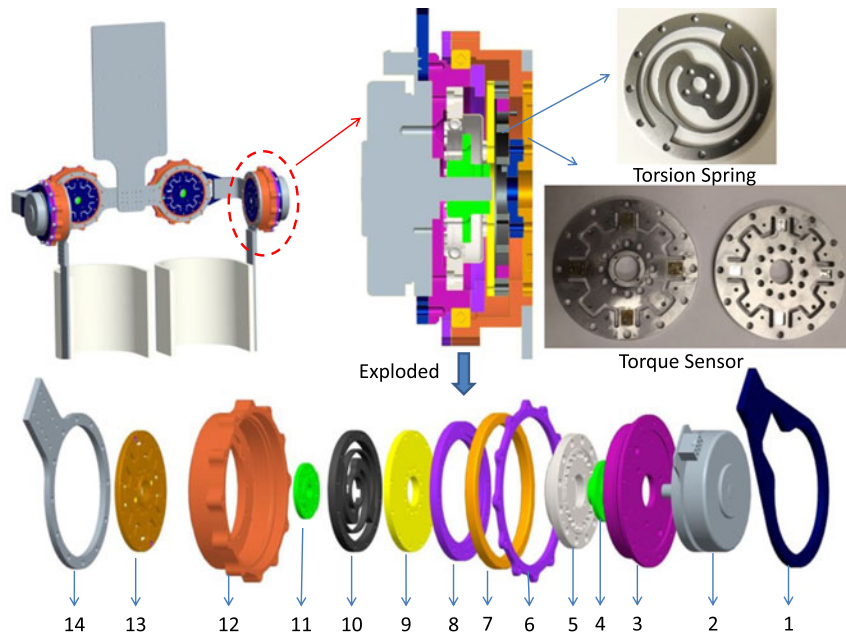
Mechanical design. 1-link, 2-motor, 3-flange, 4-coupling, 5-Harmonic Drive, 6-bearing outer bezel, 7-bearing, 8-bearing inner bezel, 9-connector with spring, 10-torsion spring, 11-link between torsion spring and torque sensor, 12-shell, 13-torque sensor, 14-link.
